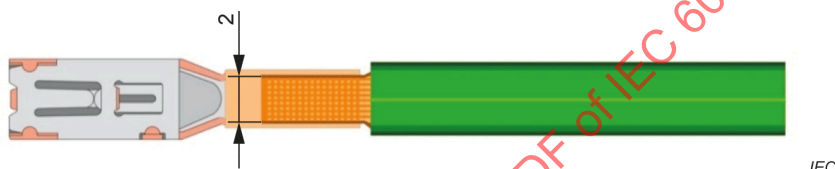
Measurement of the ultrasonic weld width (2)
